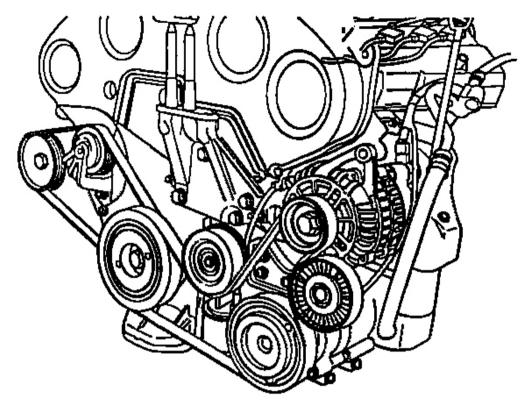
Identifying Belt Routing Courtesy of KIA MOTORS AMERICA, INC.
